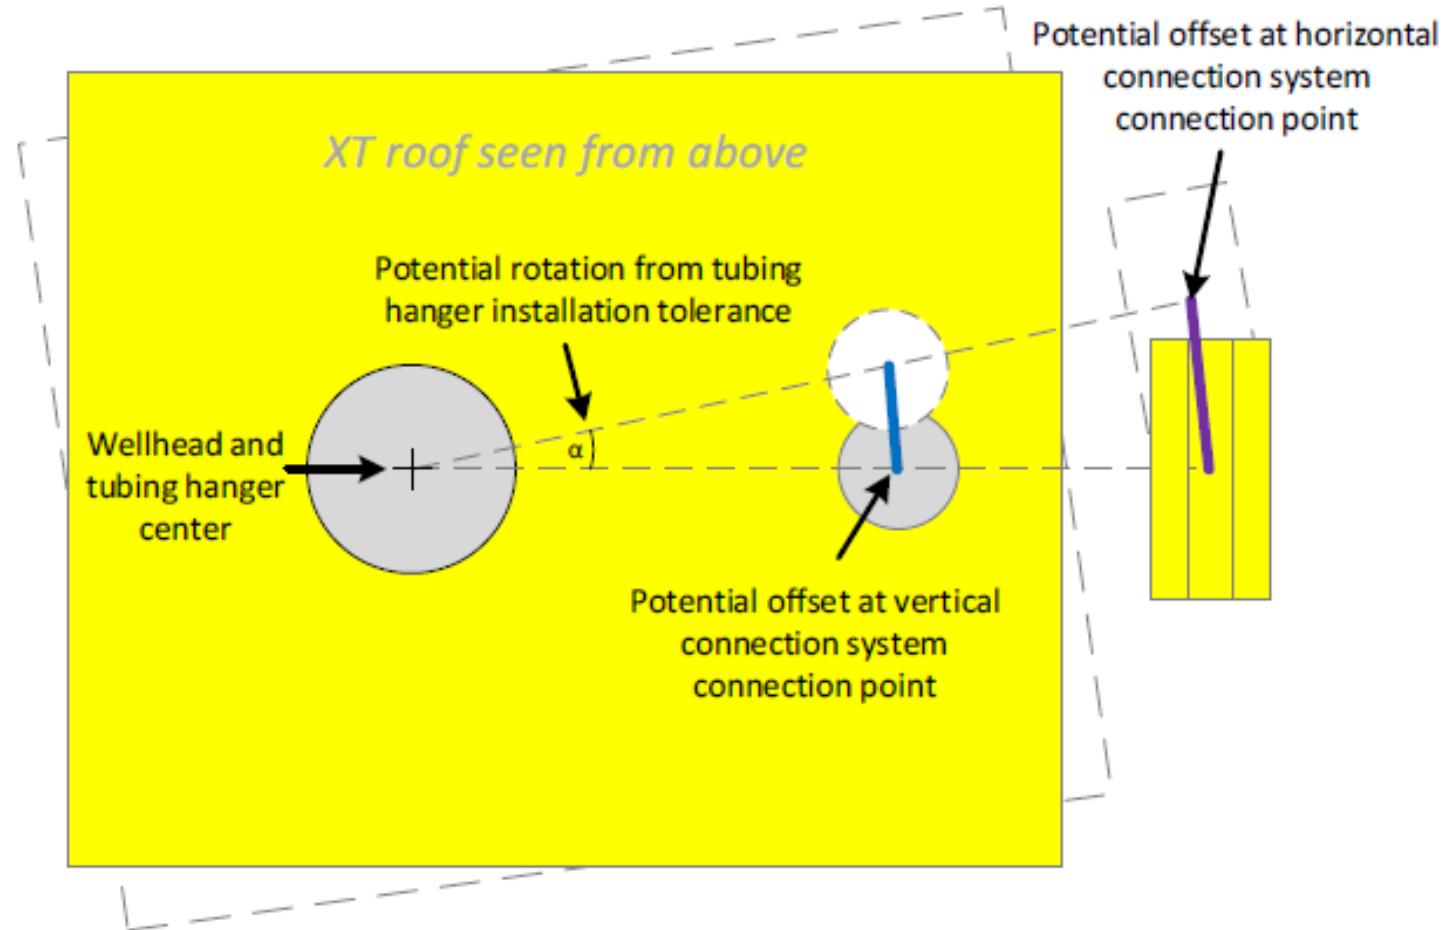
XT rooftop view of tolerance offset difference between a vertical connection point and a horizontal connection point. The horizontal connection point location requires a more flexible manifold piping due to the larger potential offset.
